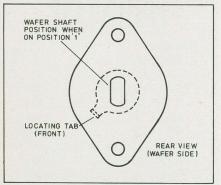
Position of the range switch shaft assembly prior to fitting the contact wafer.
